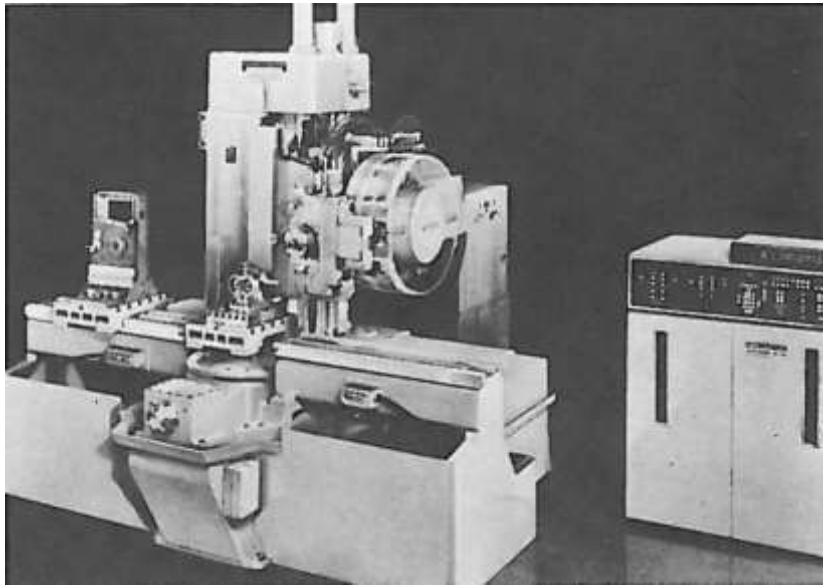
Four-axis controlled machine tool developed in 1958
